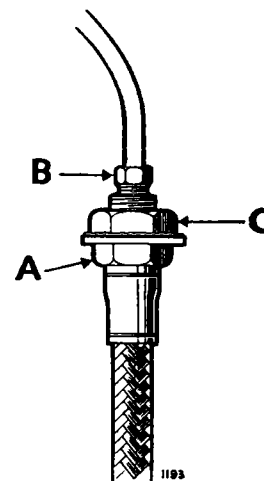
Flexible hose connection. Hold hexagon "A" with a spanner when removing or refitting locknut "C"
